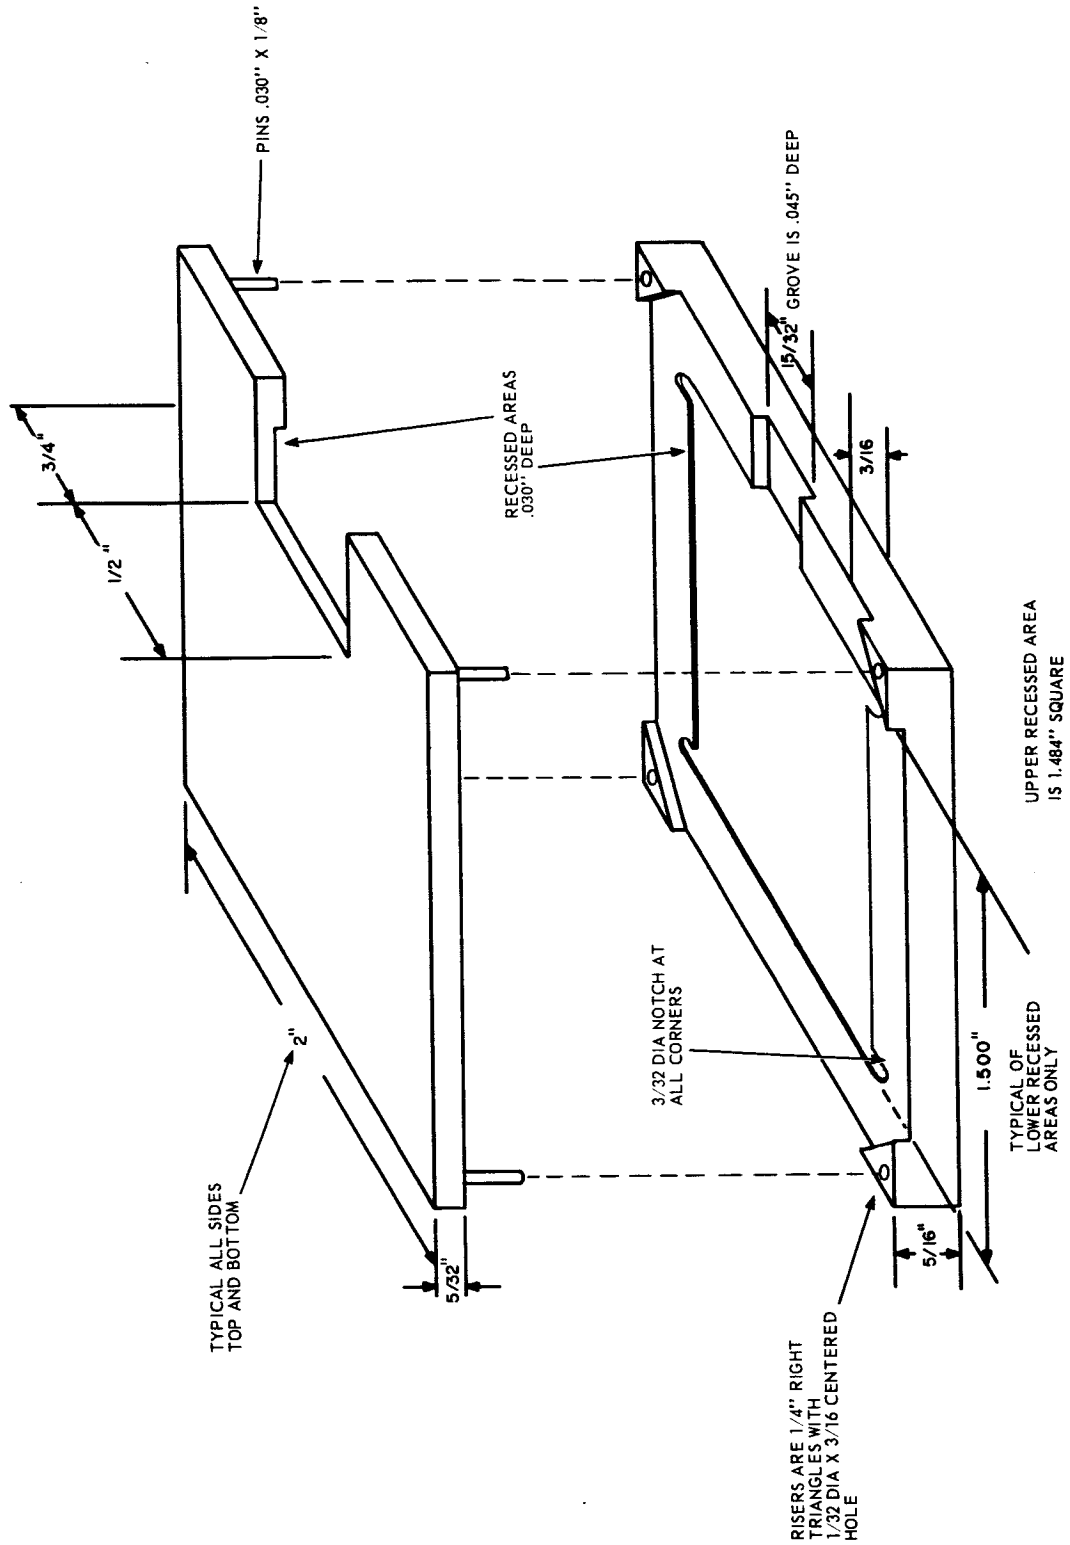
Assembly Jig, Thermoelectric Elements - Absorber Plate Subassembly to Radiator Plates
